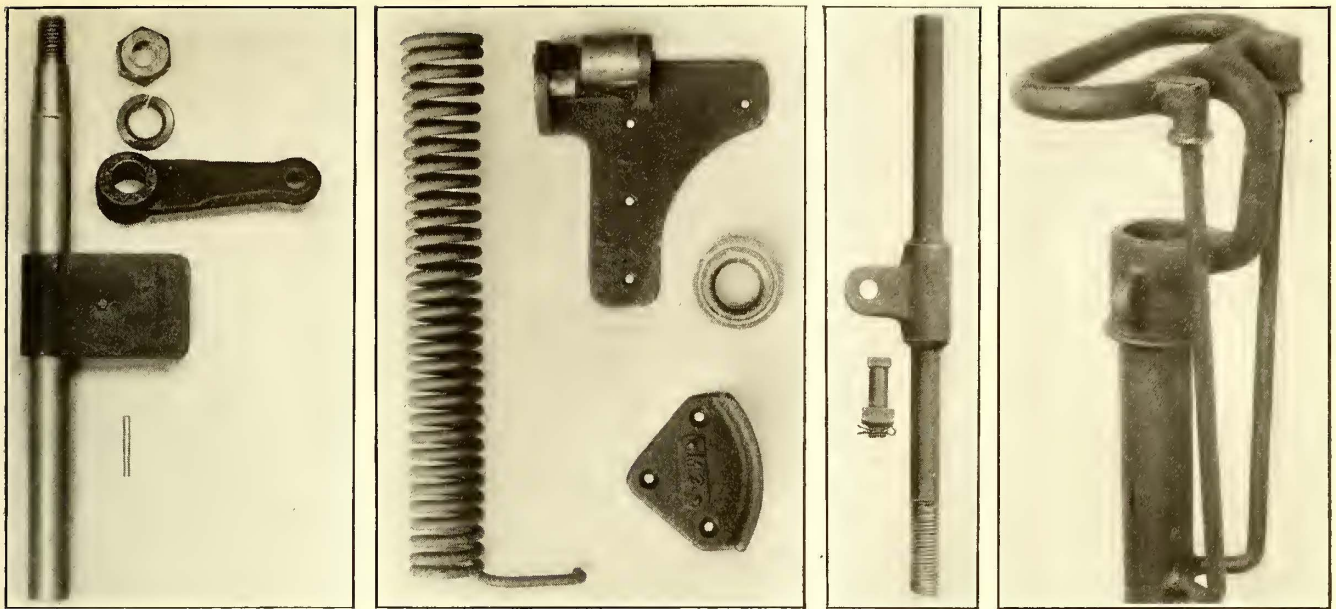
DOOR SHAFT WITH PRESSED STEEL CLIP, SHAFT LEVER, ETC.; FIG. 2—BOTTOM DOOR GUIDE AND CATCH, STEP COUNTER-BALANCE SPRING, DOOR SHOE AND BALL BEARING; FIG. 3—WELDED CROSSHEAD FOR DOOR CONNECTING ROD; FIG. 4—CONTROL STAND
